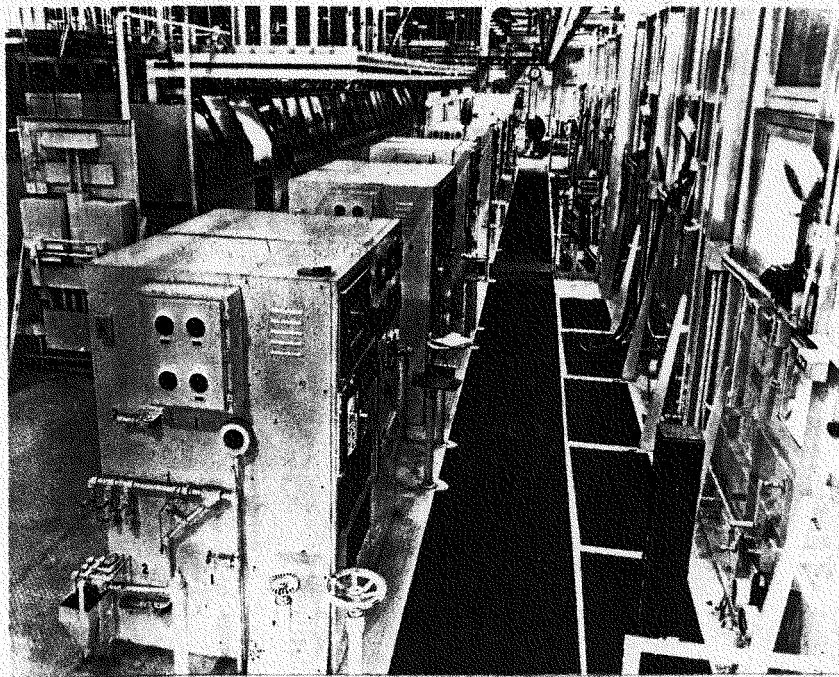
Upper floor of casting area. Note remote facilities for handling crucibles.
